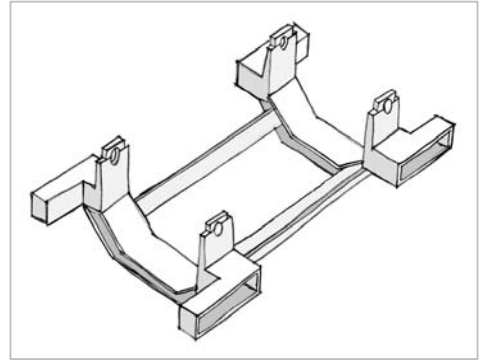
Transport Frame with light side beams and corner bolted beams
